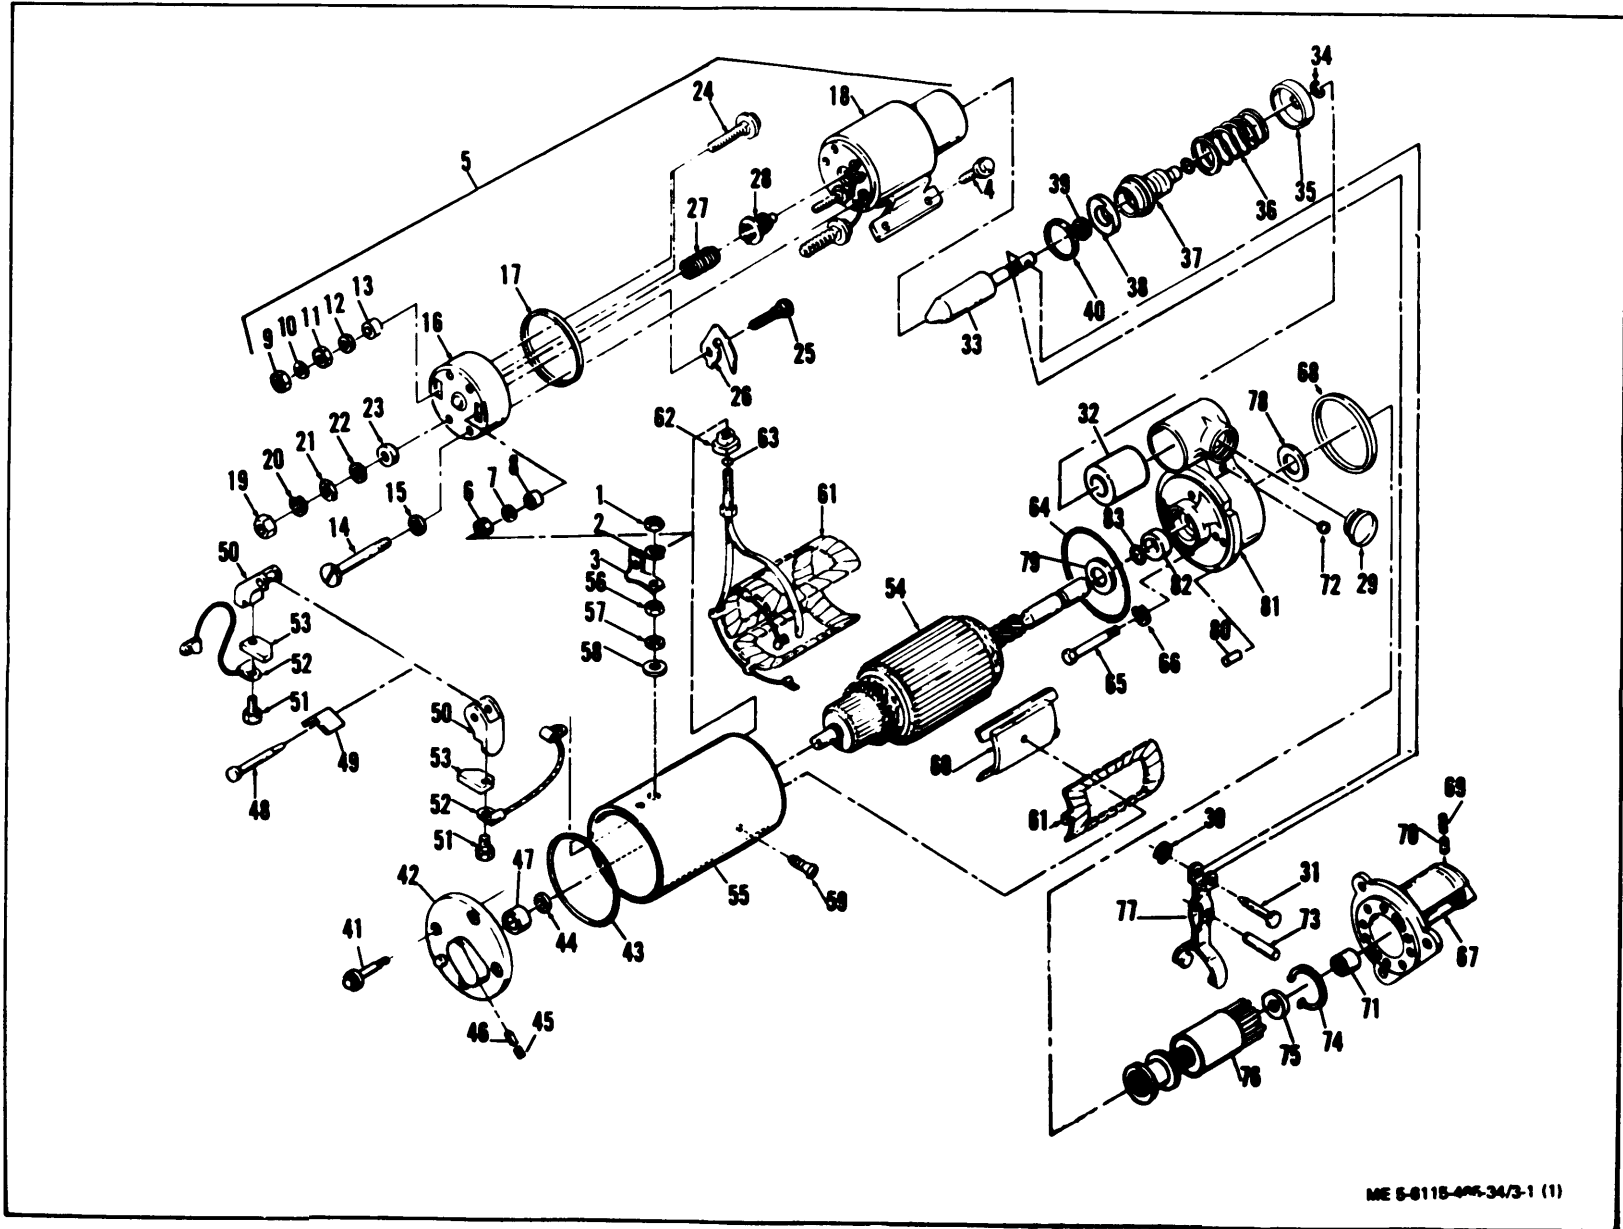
Starter Assembly, Exploded View (Sheet 1 of 2)
